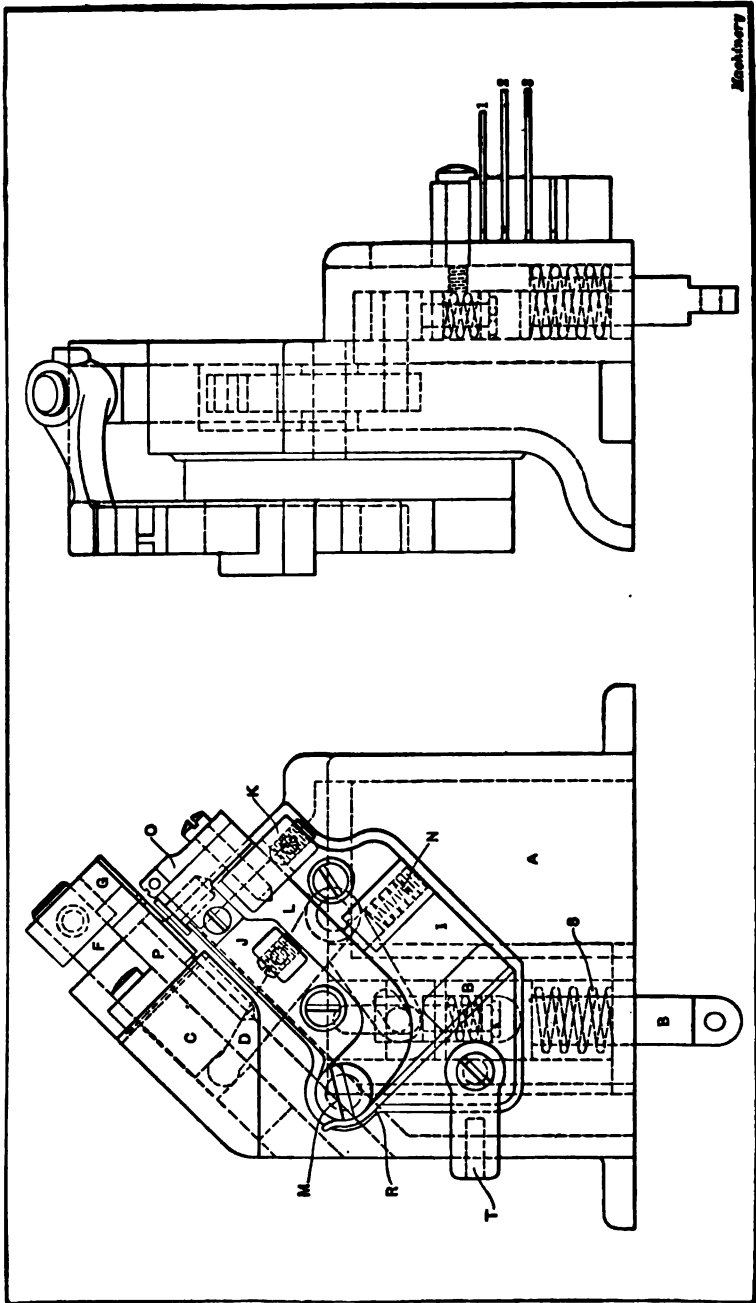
Machine for Soldering Straps to Eye-pieces and Bridges
